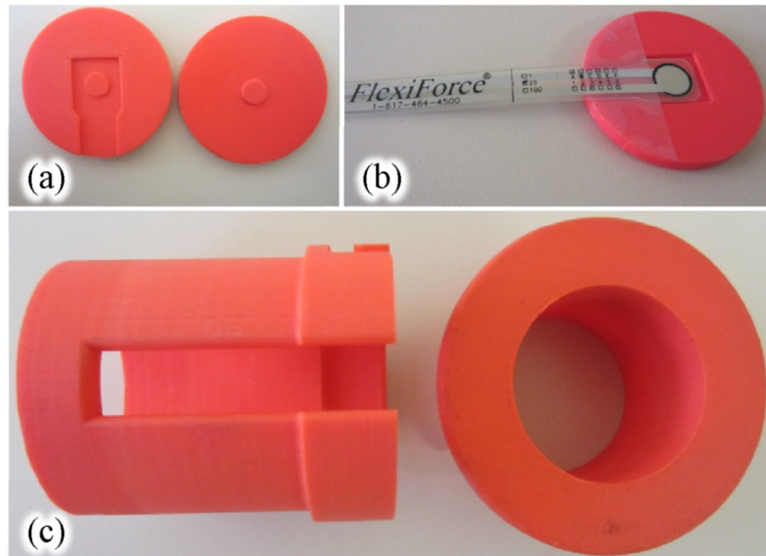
Pucks and puck holder for sensor arrangement. (a) Top and low views of sensors' pucks with tailored notch to allow sensor placement. (b) Puck with a bonded force sensor ready to be mounted on puck holder. (c) Unassembled puck holder to be mounted on the frame support
